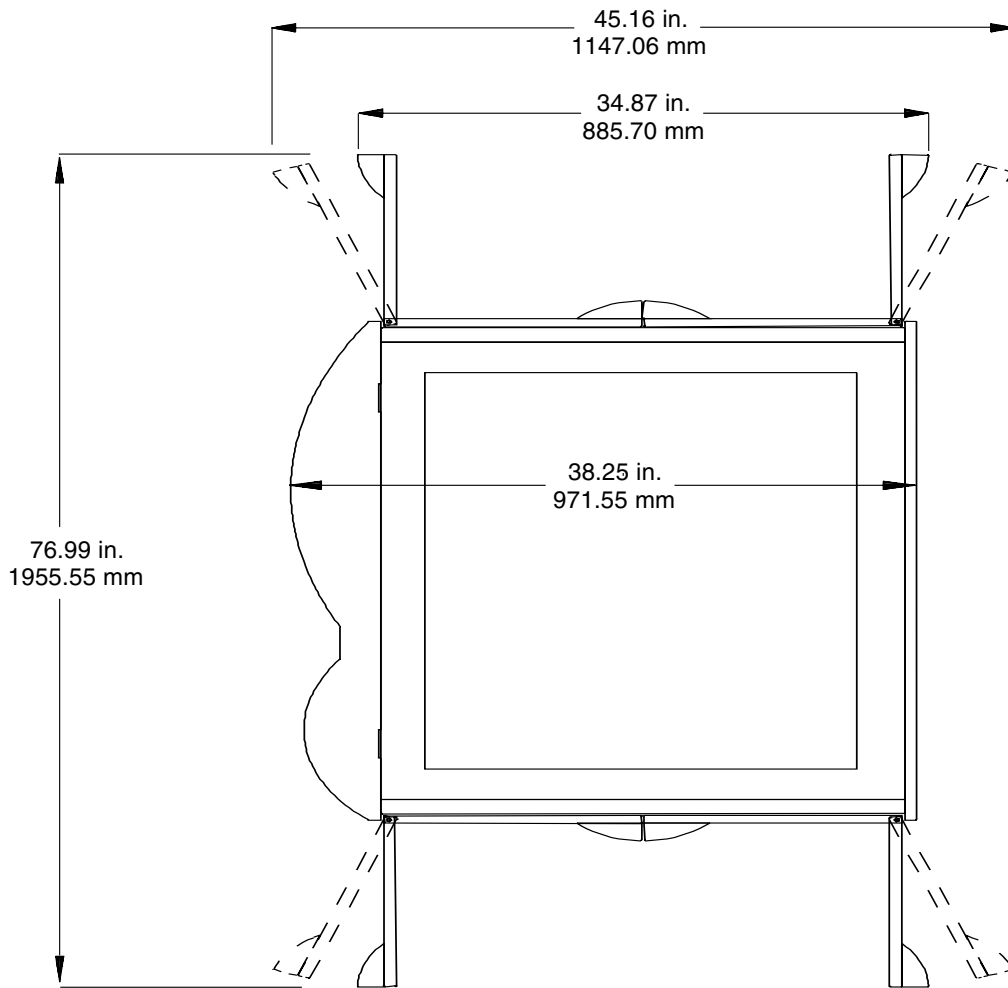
Sun Enterprise 10000 System Cabinet Clearance Dimensions—Top View
